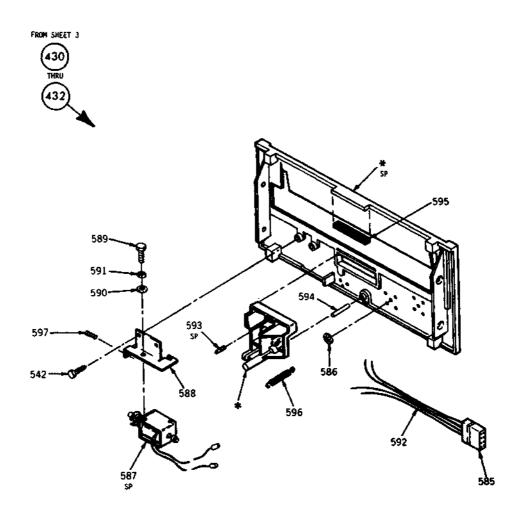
DRIVE MOTOR AND LIFTER ASSEMBLIES
